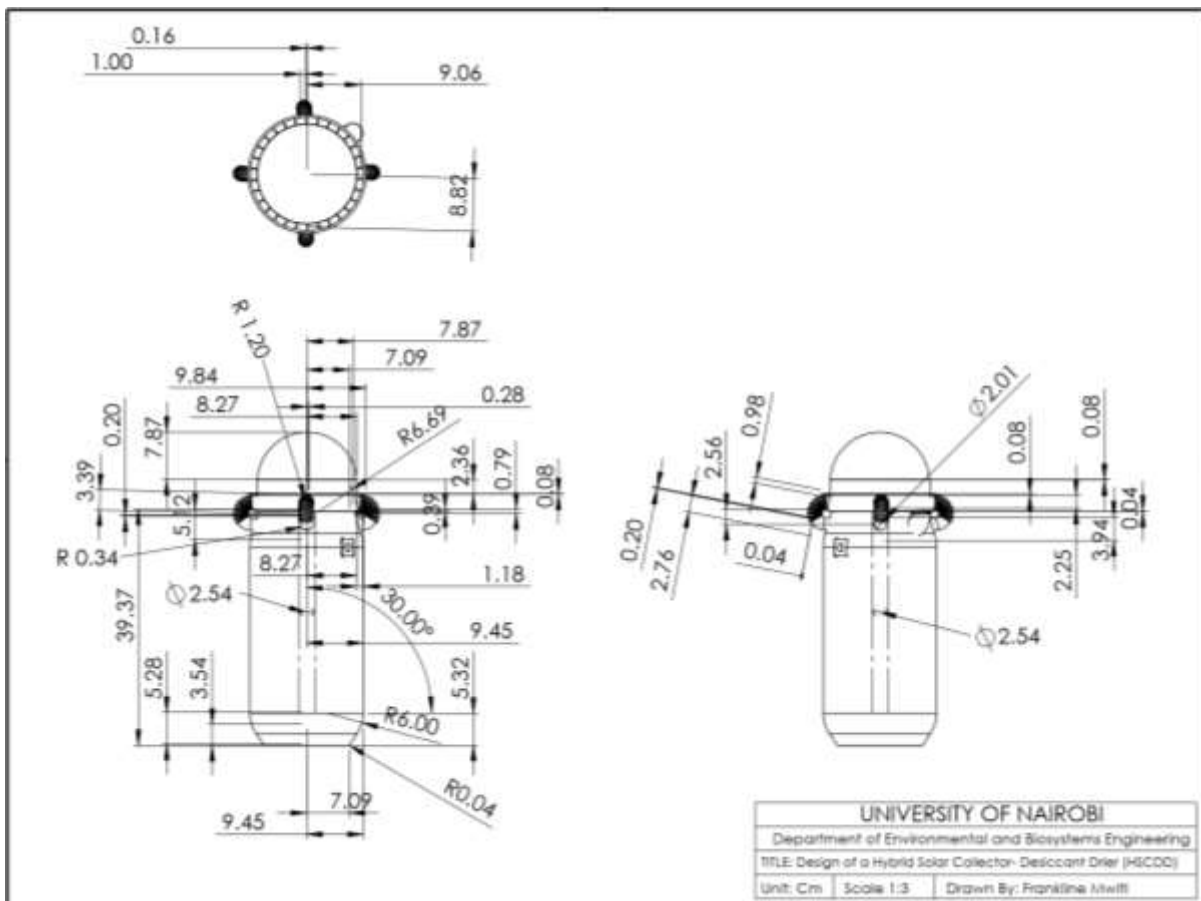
Detailed drawing of the Hybrid solar desiccant dryer
